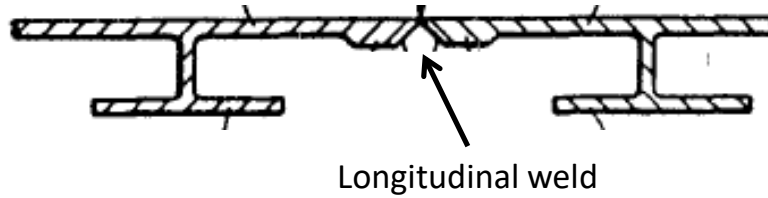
Section cut of an aluminum extrusion showing the longitudinal weld detail between the top flange of adjacent elements [2]
